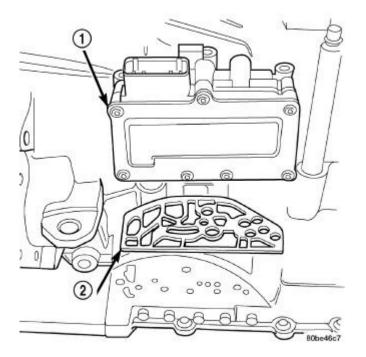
Identifying Solenoid/Pressure Switch Assembly & Gasket Courtesy of CHRYSLER LLC
